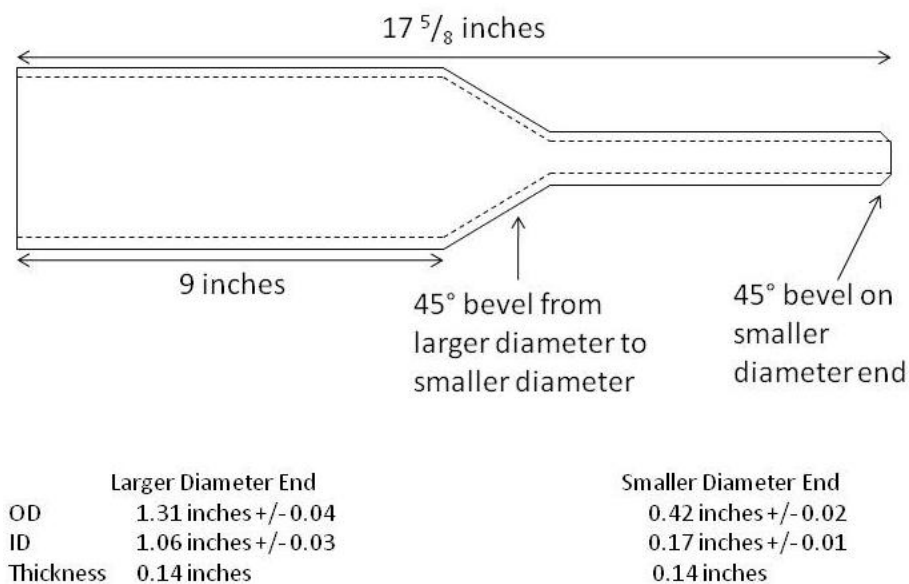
Alumina combustion tube dimensions, modified from McDanel Ceramics combustion tube 30505.
